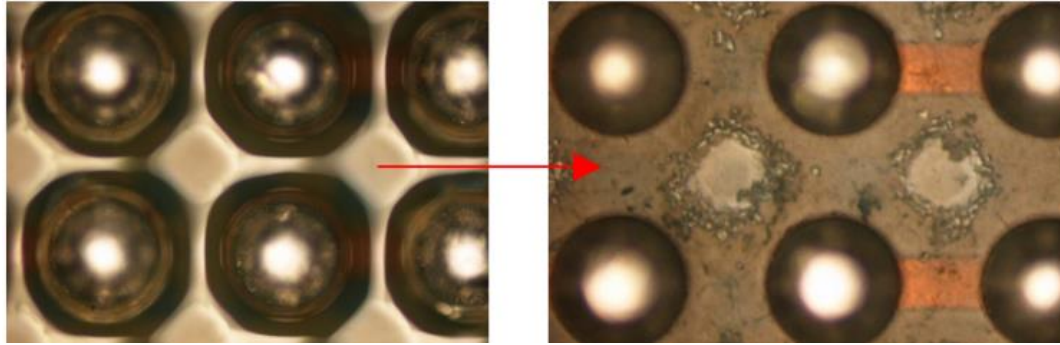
BGA before (left) and after (right) paste flux residue removal.
